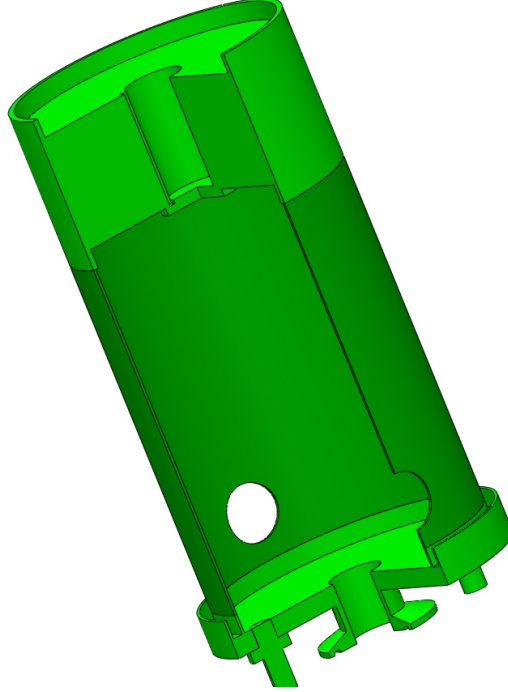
The Torque Transfer Element integrated in the cryostat. - The TTE is shown with one quarter cut away to increase visibility. It is welded to the bottom of the LN_2 chamber of the cryostat which accommodates the torque locking shaft socket the HTS field winding is lowered into. The vacuum valve is placed at the bottom of the TTE as an evacuation access point.
